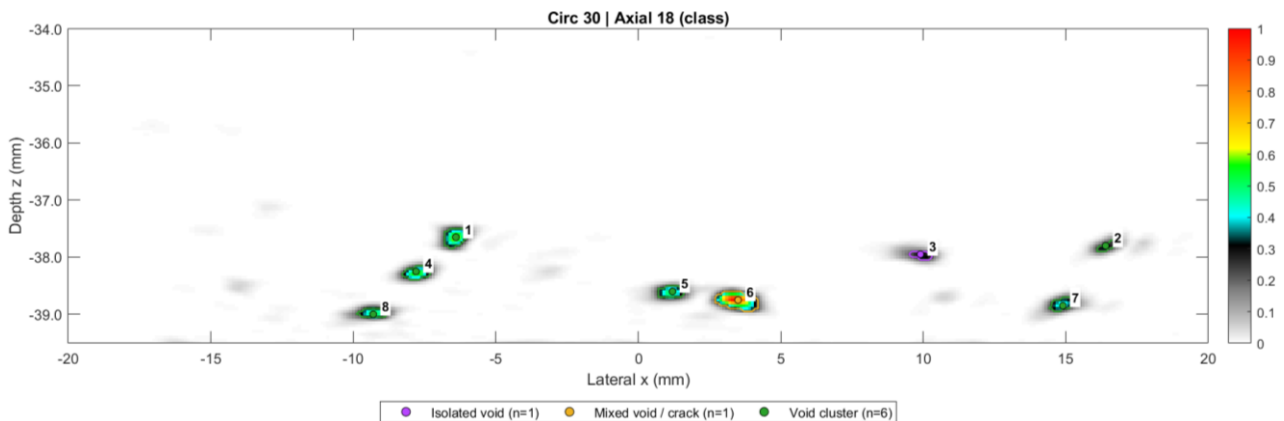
An example of classified HIC inspection image showing different HIC defect stages obtained using the supervised machine learning
